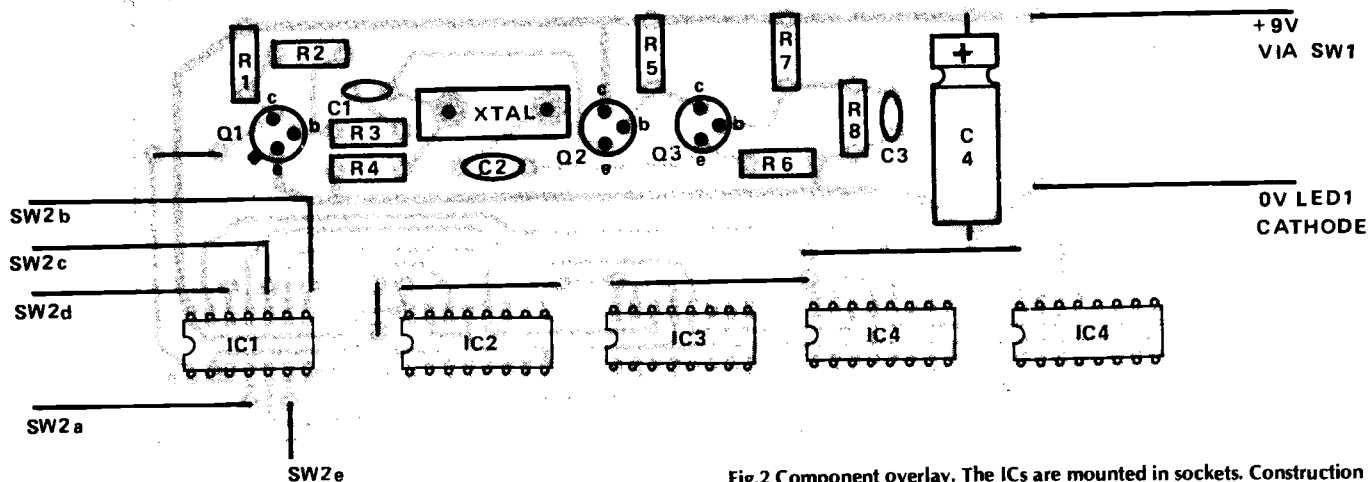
Component overlay. The ICs are mounted in sockets. Construction of the board is fairly straightforward.
